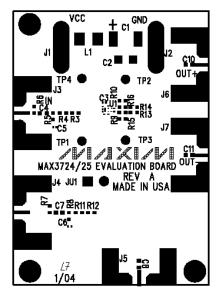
MAX3724/MAX3725 EV Kit PC Component Placement Guide—Component Side
